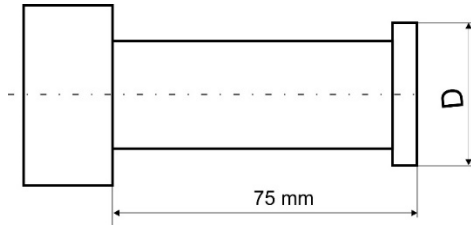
Gauge for measuring the liner bore at 75 mm depth
